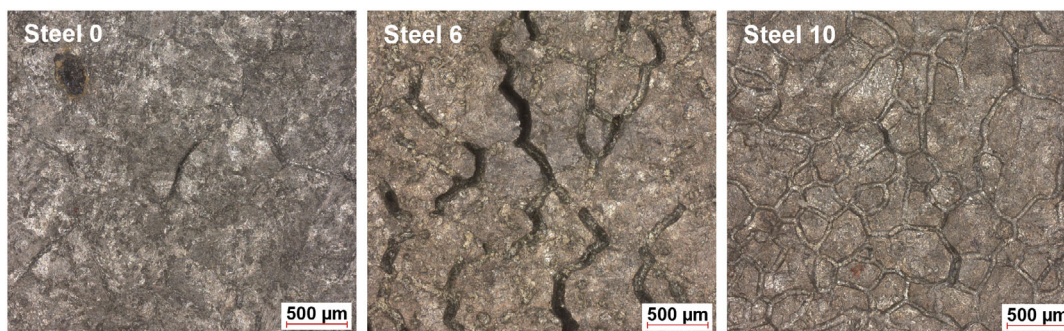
Crack appearance of steel 0, steel 6, and steel 10 around the bending axis.
